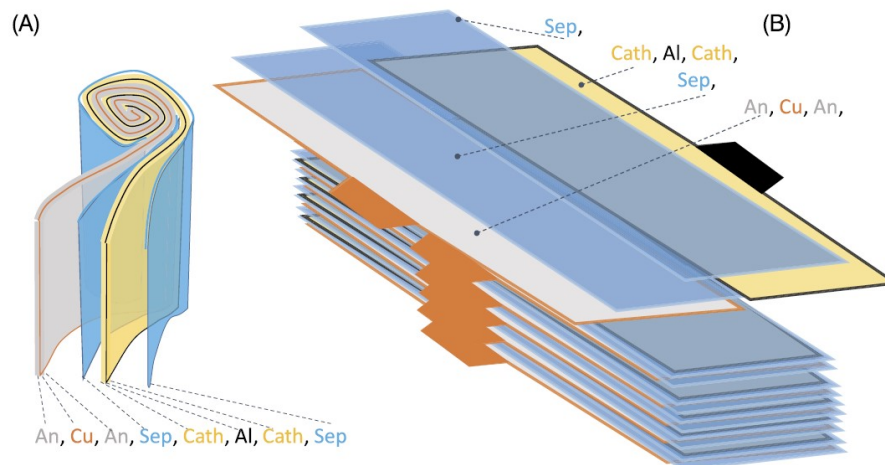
(A) Assembly principal for a cylindrical LIB. (B) Assembly principal for a pouch LIB [11].
